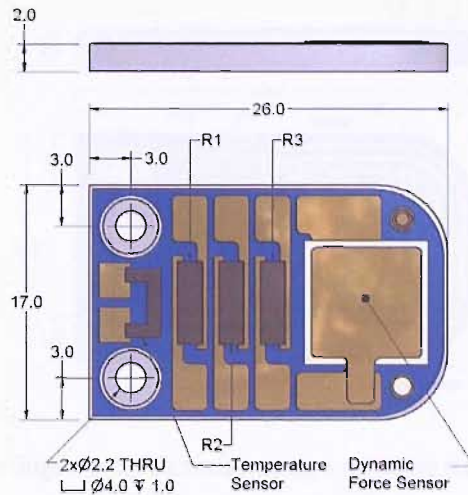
Prototype fingertip 2, fabricated using a stainless steel type 430 substrate (all dimensions in mm).
